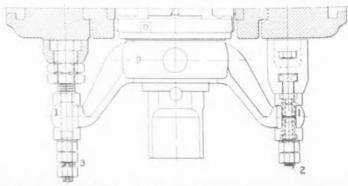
Top View of a Bearing Housing for Dealing with Axial Pressure at One End of the Roll, with Device for Lateral Adjustment
